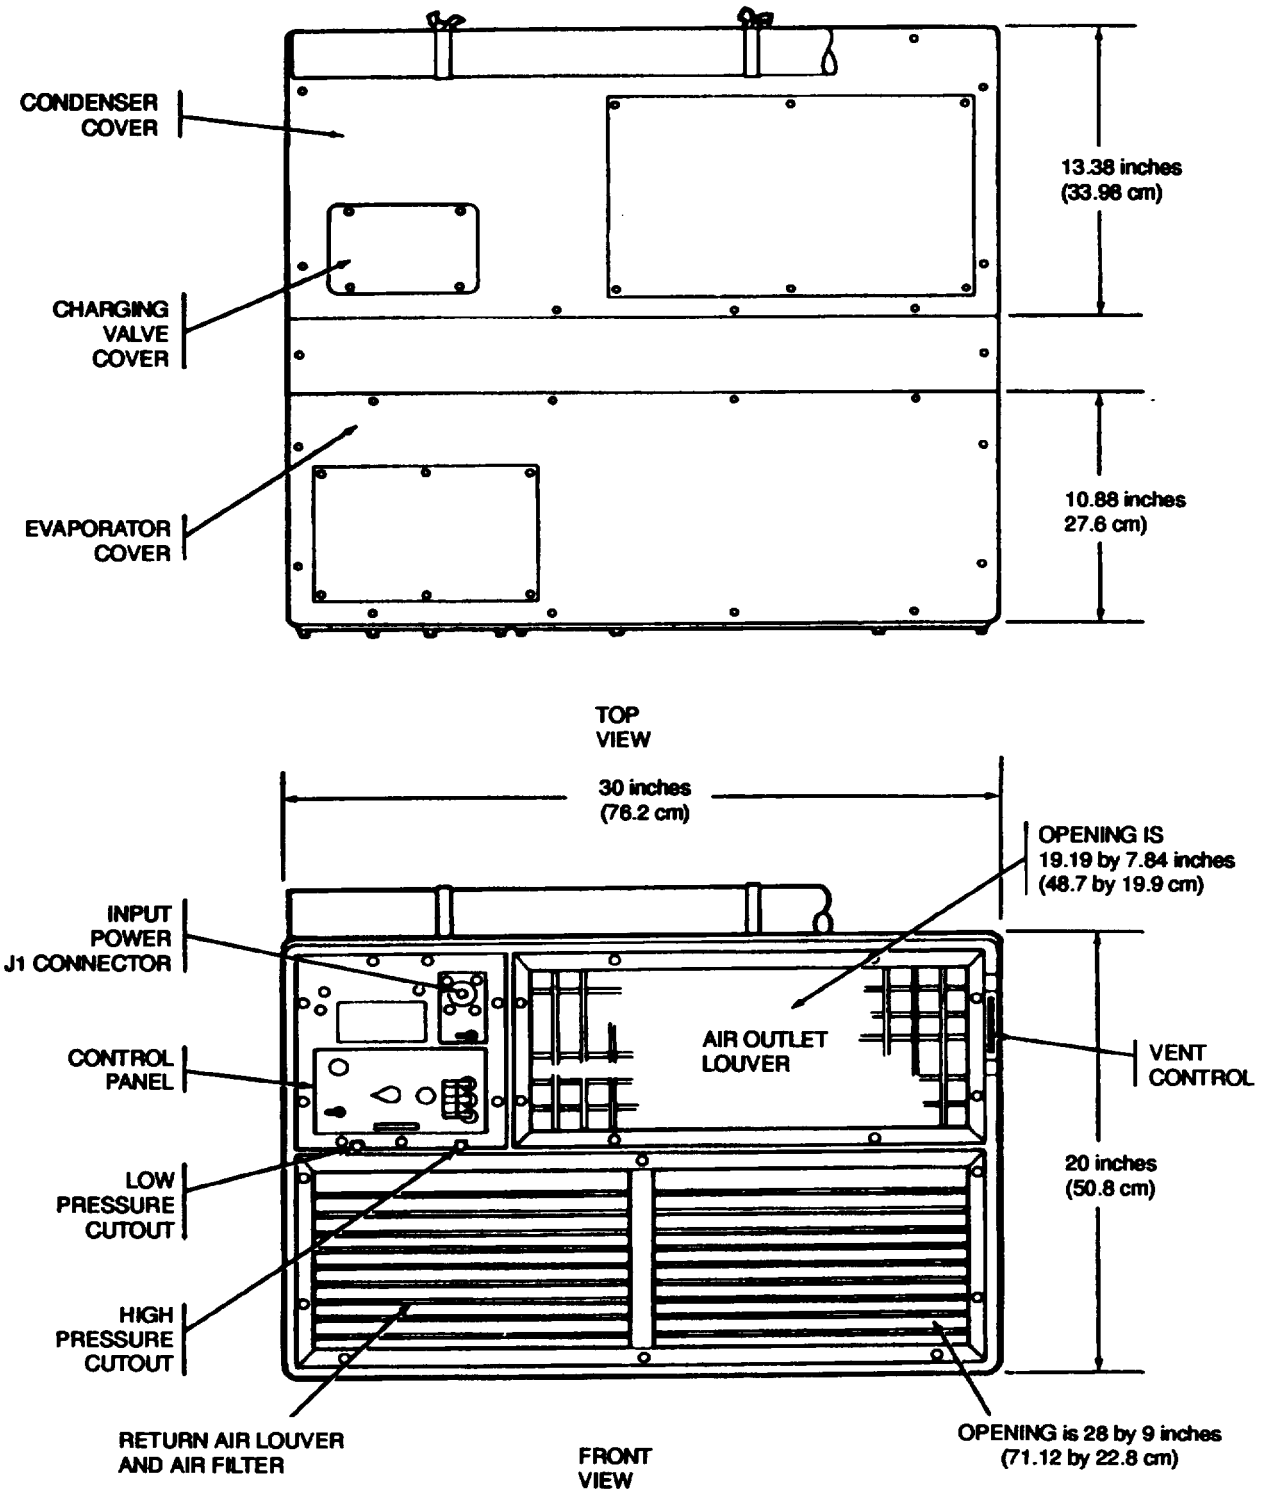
Installation Dimensions (Sheet 1 of 2)
